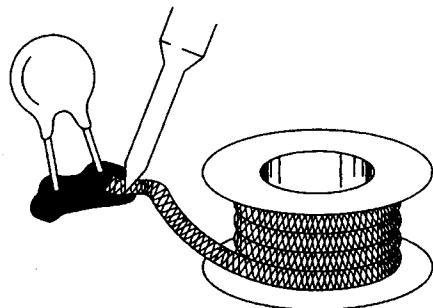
Heat the de-soldering braid against the solder overflow.
